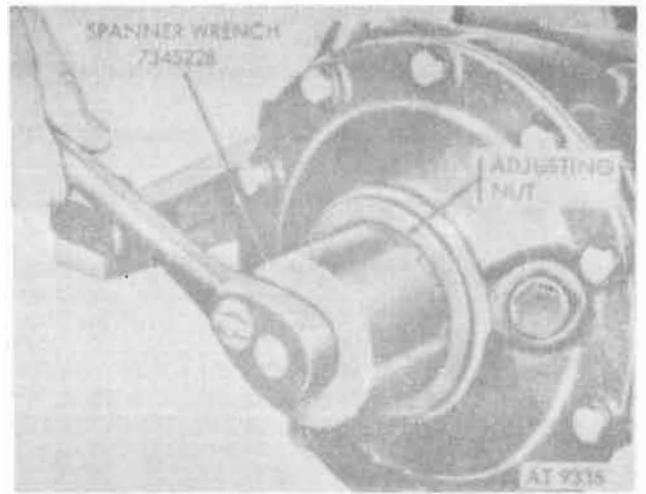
Using spanner wrench (7345228) to loosen or tighten differential case bearing adjusting nuts.
